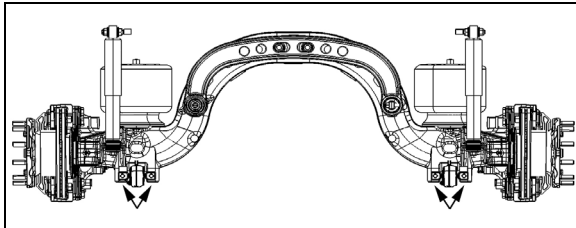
JACKING POINTS ON TAG AXLE 11029
